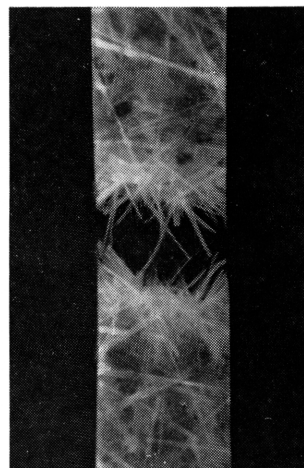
Fracture caused by tension of less than 8 kg/mm².
